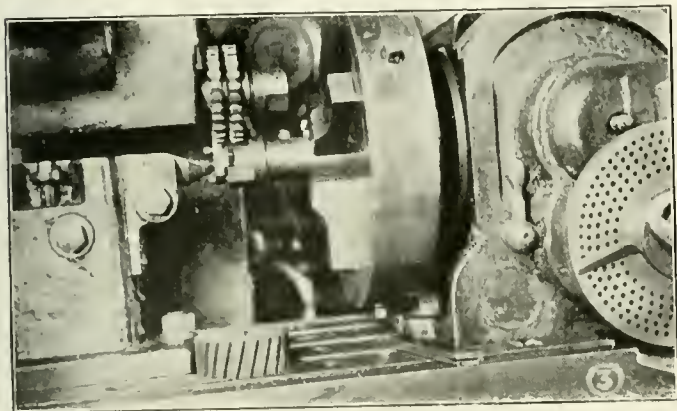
Milling the Cutting Edges of Flue Cutter Knives to Width
